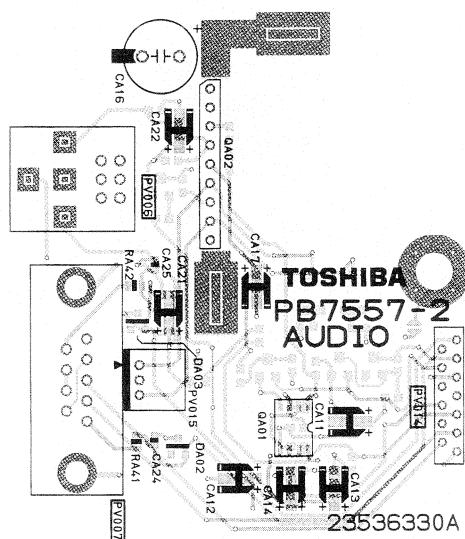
U0032 Audio PC Board (Top Side)
